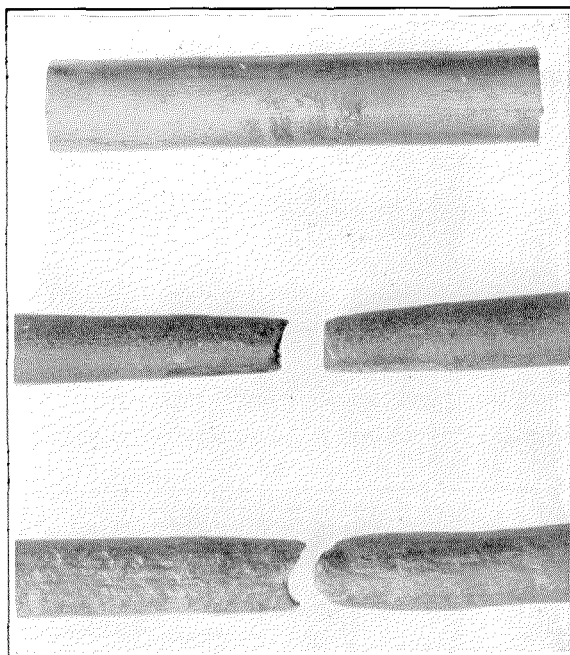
Typical Tensile Fractures in Unalloyed Lead. Top—Sheath Before Testing. Center—Fracture in Extruded Sheath—Testing Speed 0.2 in./in./min. Bottom—Fracture in Sheath Annealed at 250° C for 18 Hrs. Testing Speed 0.2 in./in./min.
